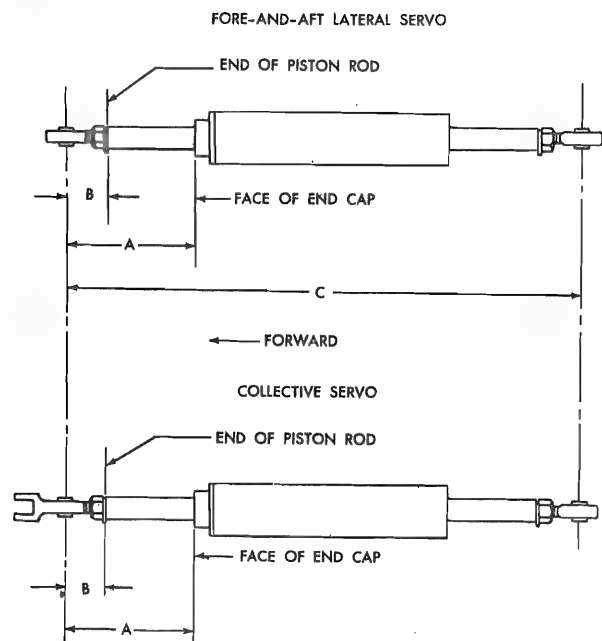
Rigging Dimensions—Main Rotor Auxiliary Servo Units
